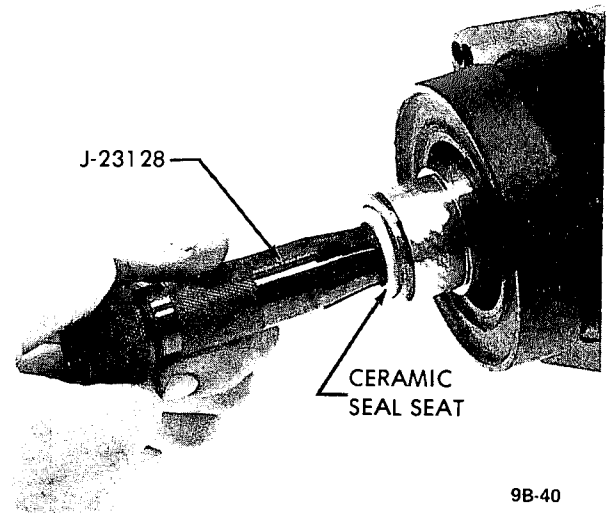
B-63 Removing or Installing Ceramic Shaft Seal Seat - 6 Cylinder Compressor
